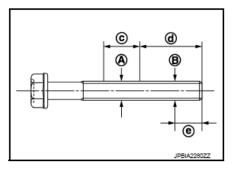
Locating Main Bearing Cap Sub Bolt Outer Diameter Measurement Points Courtesy of NISSAN NORTH AMERICA, INC.
